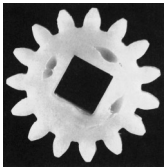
Section through a moulded nylon gear showing three large shrinkage holes
